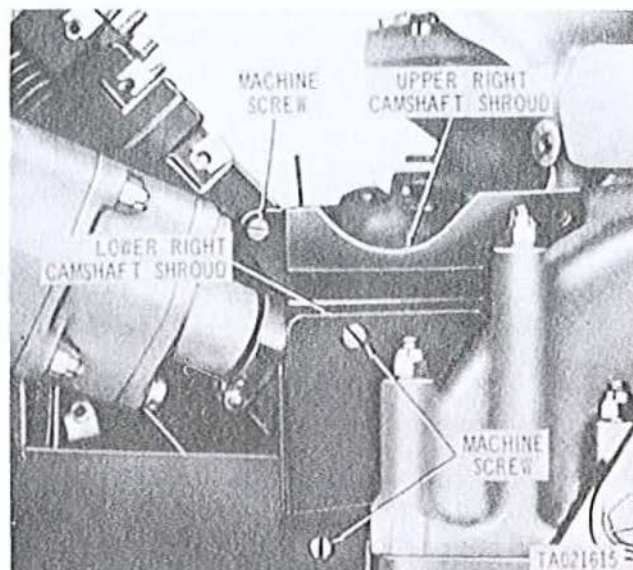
Removing or installing camshaft drive shrouds - right side.
